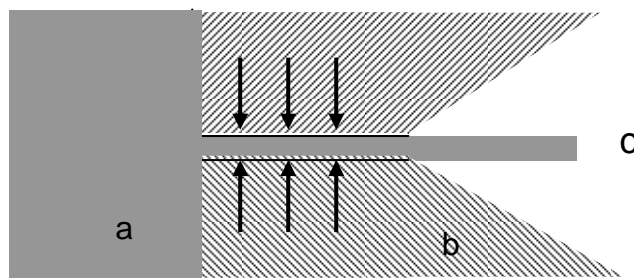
The Bearing Channel (a: Billet; b: Die; c: Extruded Profile)
